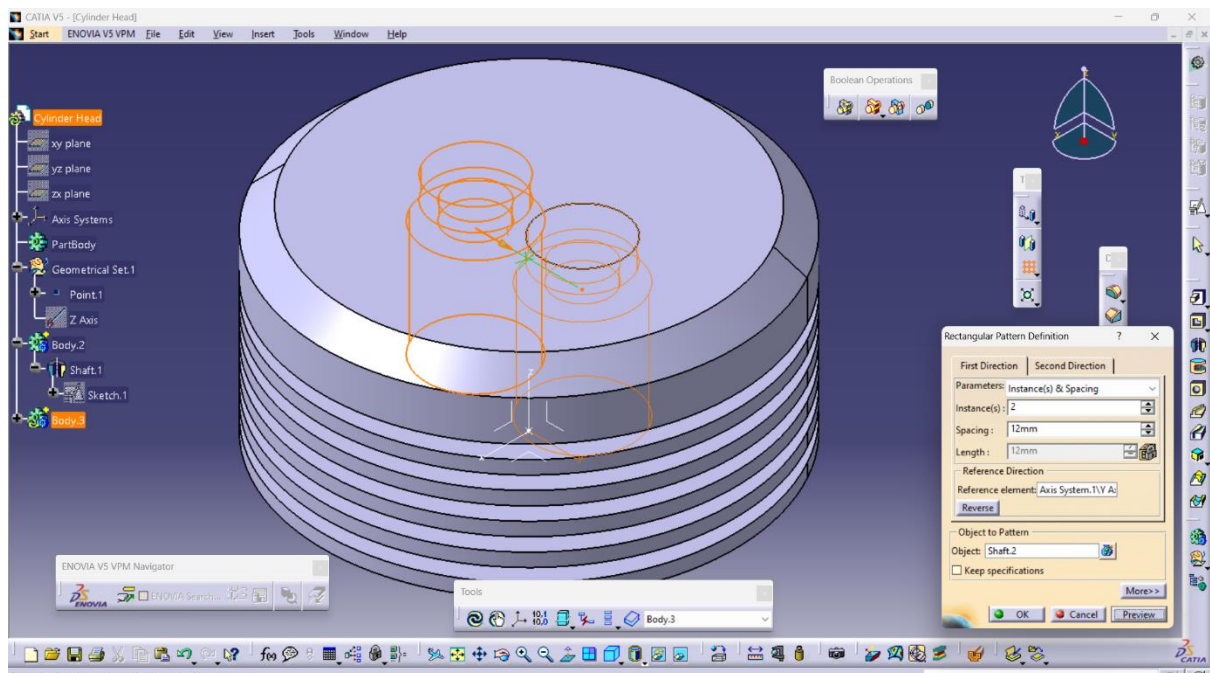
Transforming a Body3 element using Rectangular Pattern
